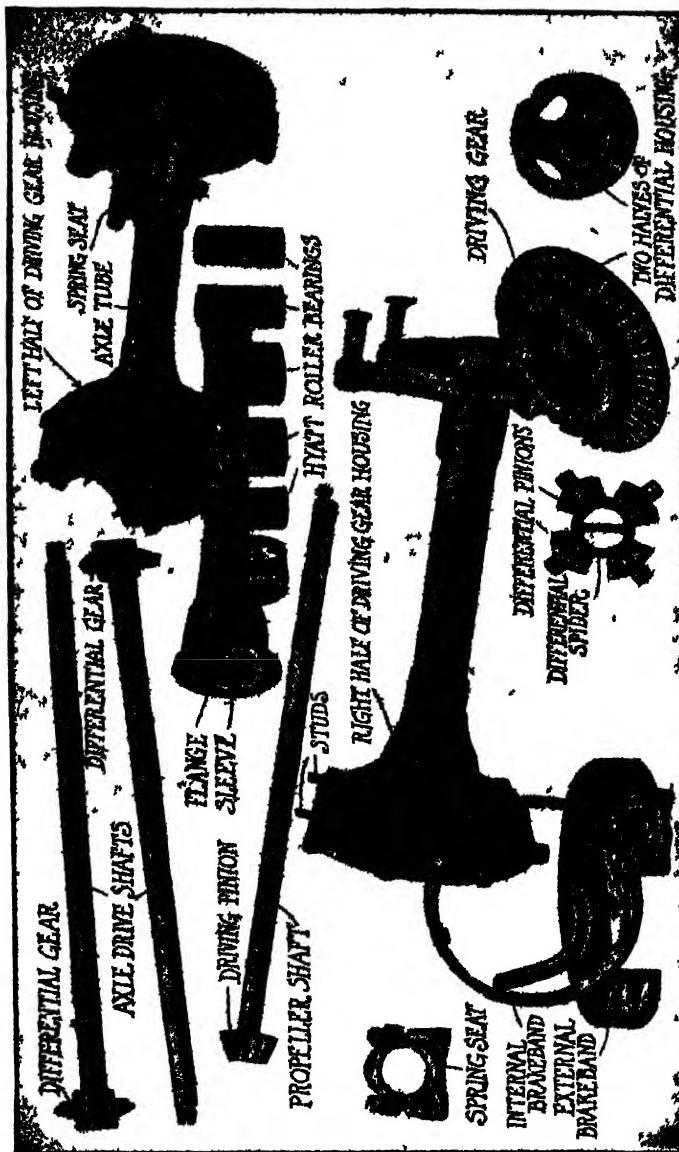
Parts Comprising Early Buick Non Floating Axe.
